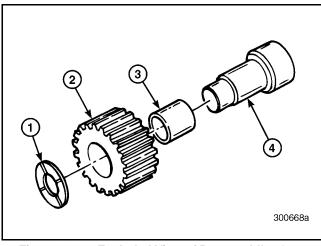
Exploded View of Reverse Idler Gear Assembly
